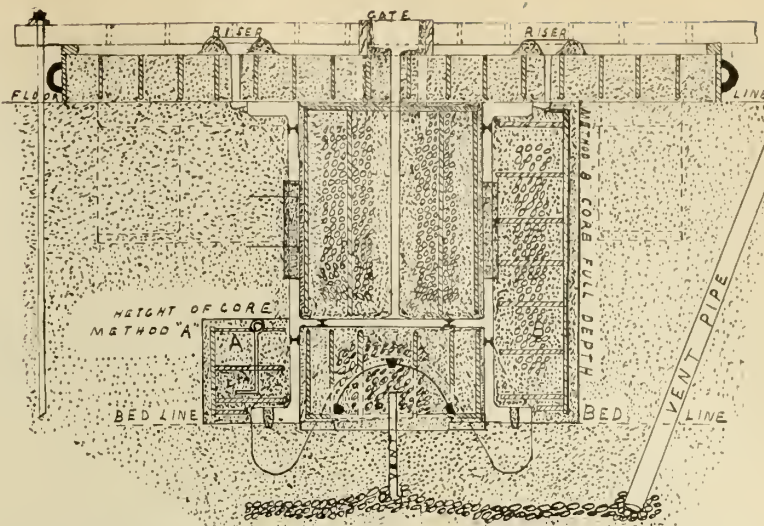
SHOWING SECTION OF ASSEMBLED MOULD FOR MARINE THRUST BEARING BLOCK.
